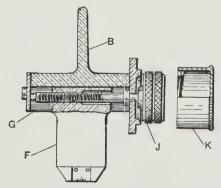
Section on XX (Fig. 14)—Showing top view of auxiliary benchmark J—Longitudinal adjusting screw.
